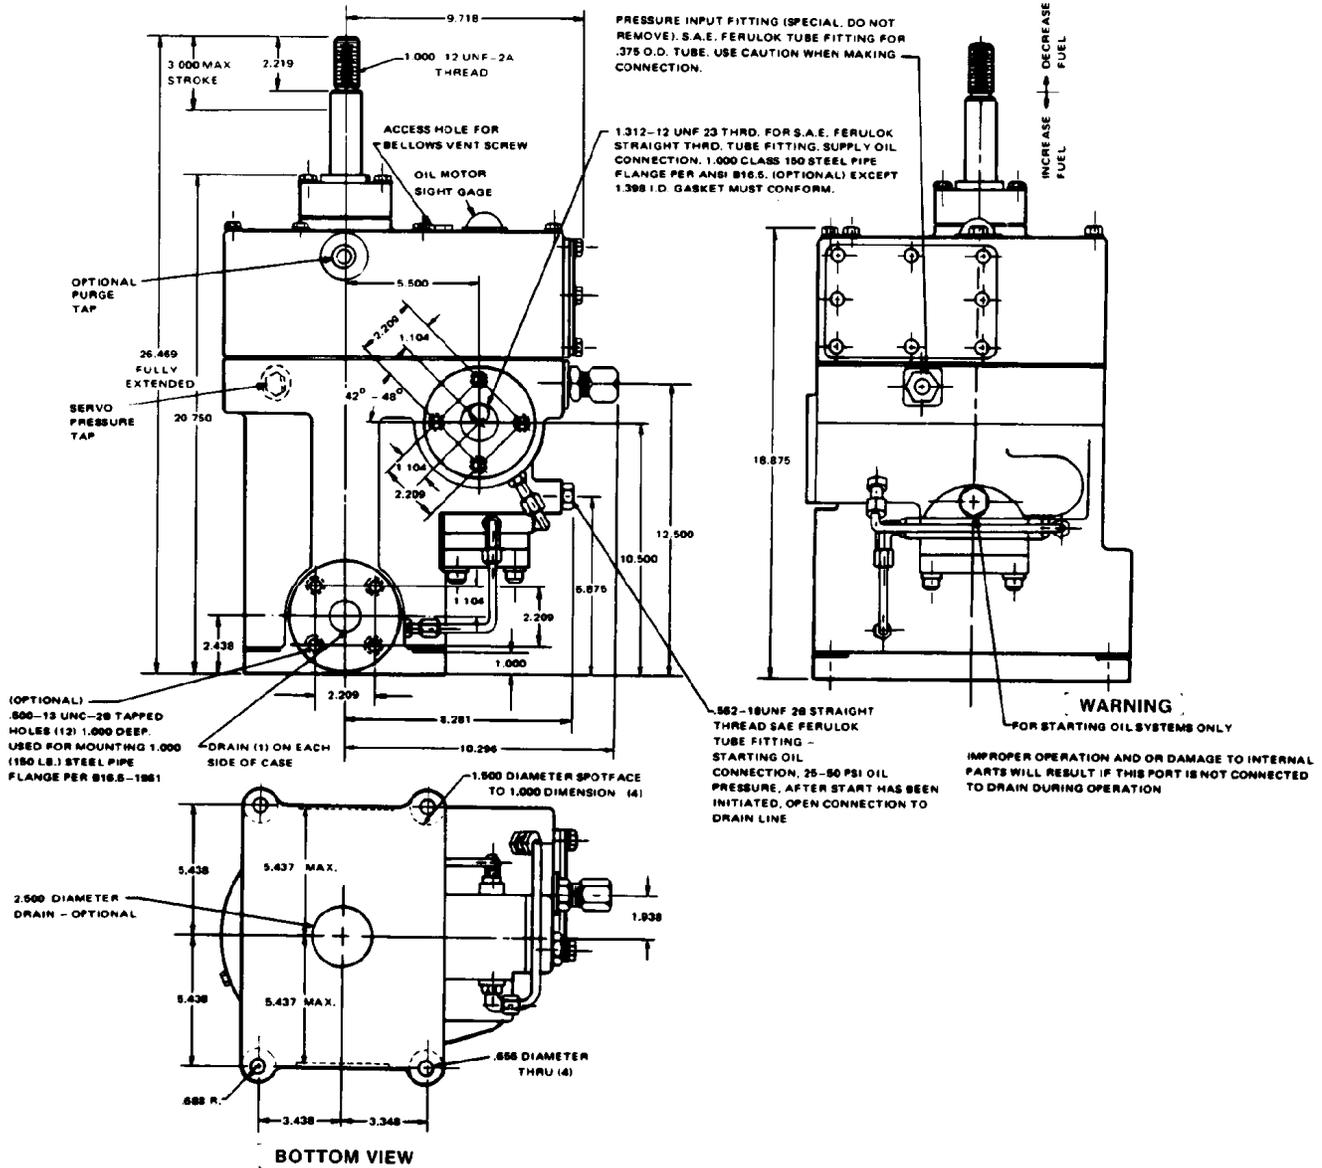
Outline Drawing of 7-1/4" Pressure Input Hydraulic Amplifier
